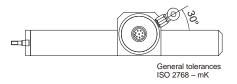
Mechanical Dimensions – Option compressed air connection
